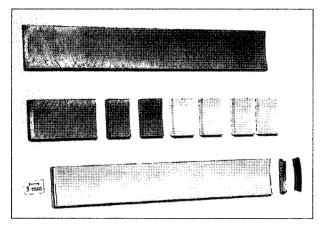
Steps for machining of the GGL26Cr and SILITEC test samples from liners.
